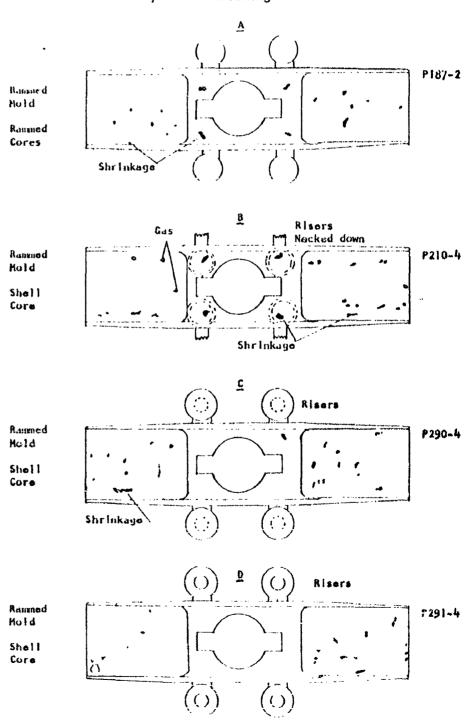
SHRINKAGE IN HEAVY SECTION
